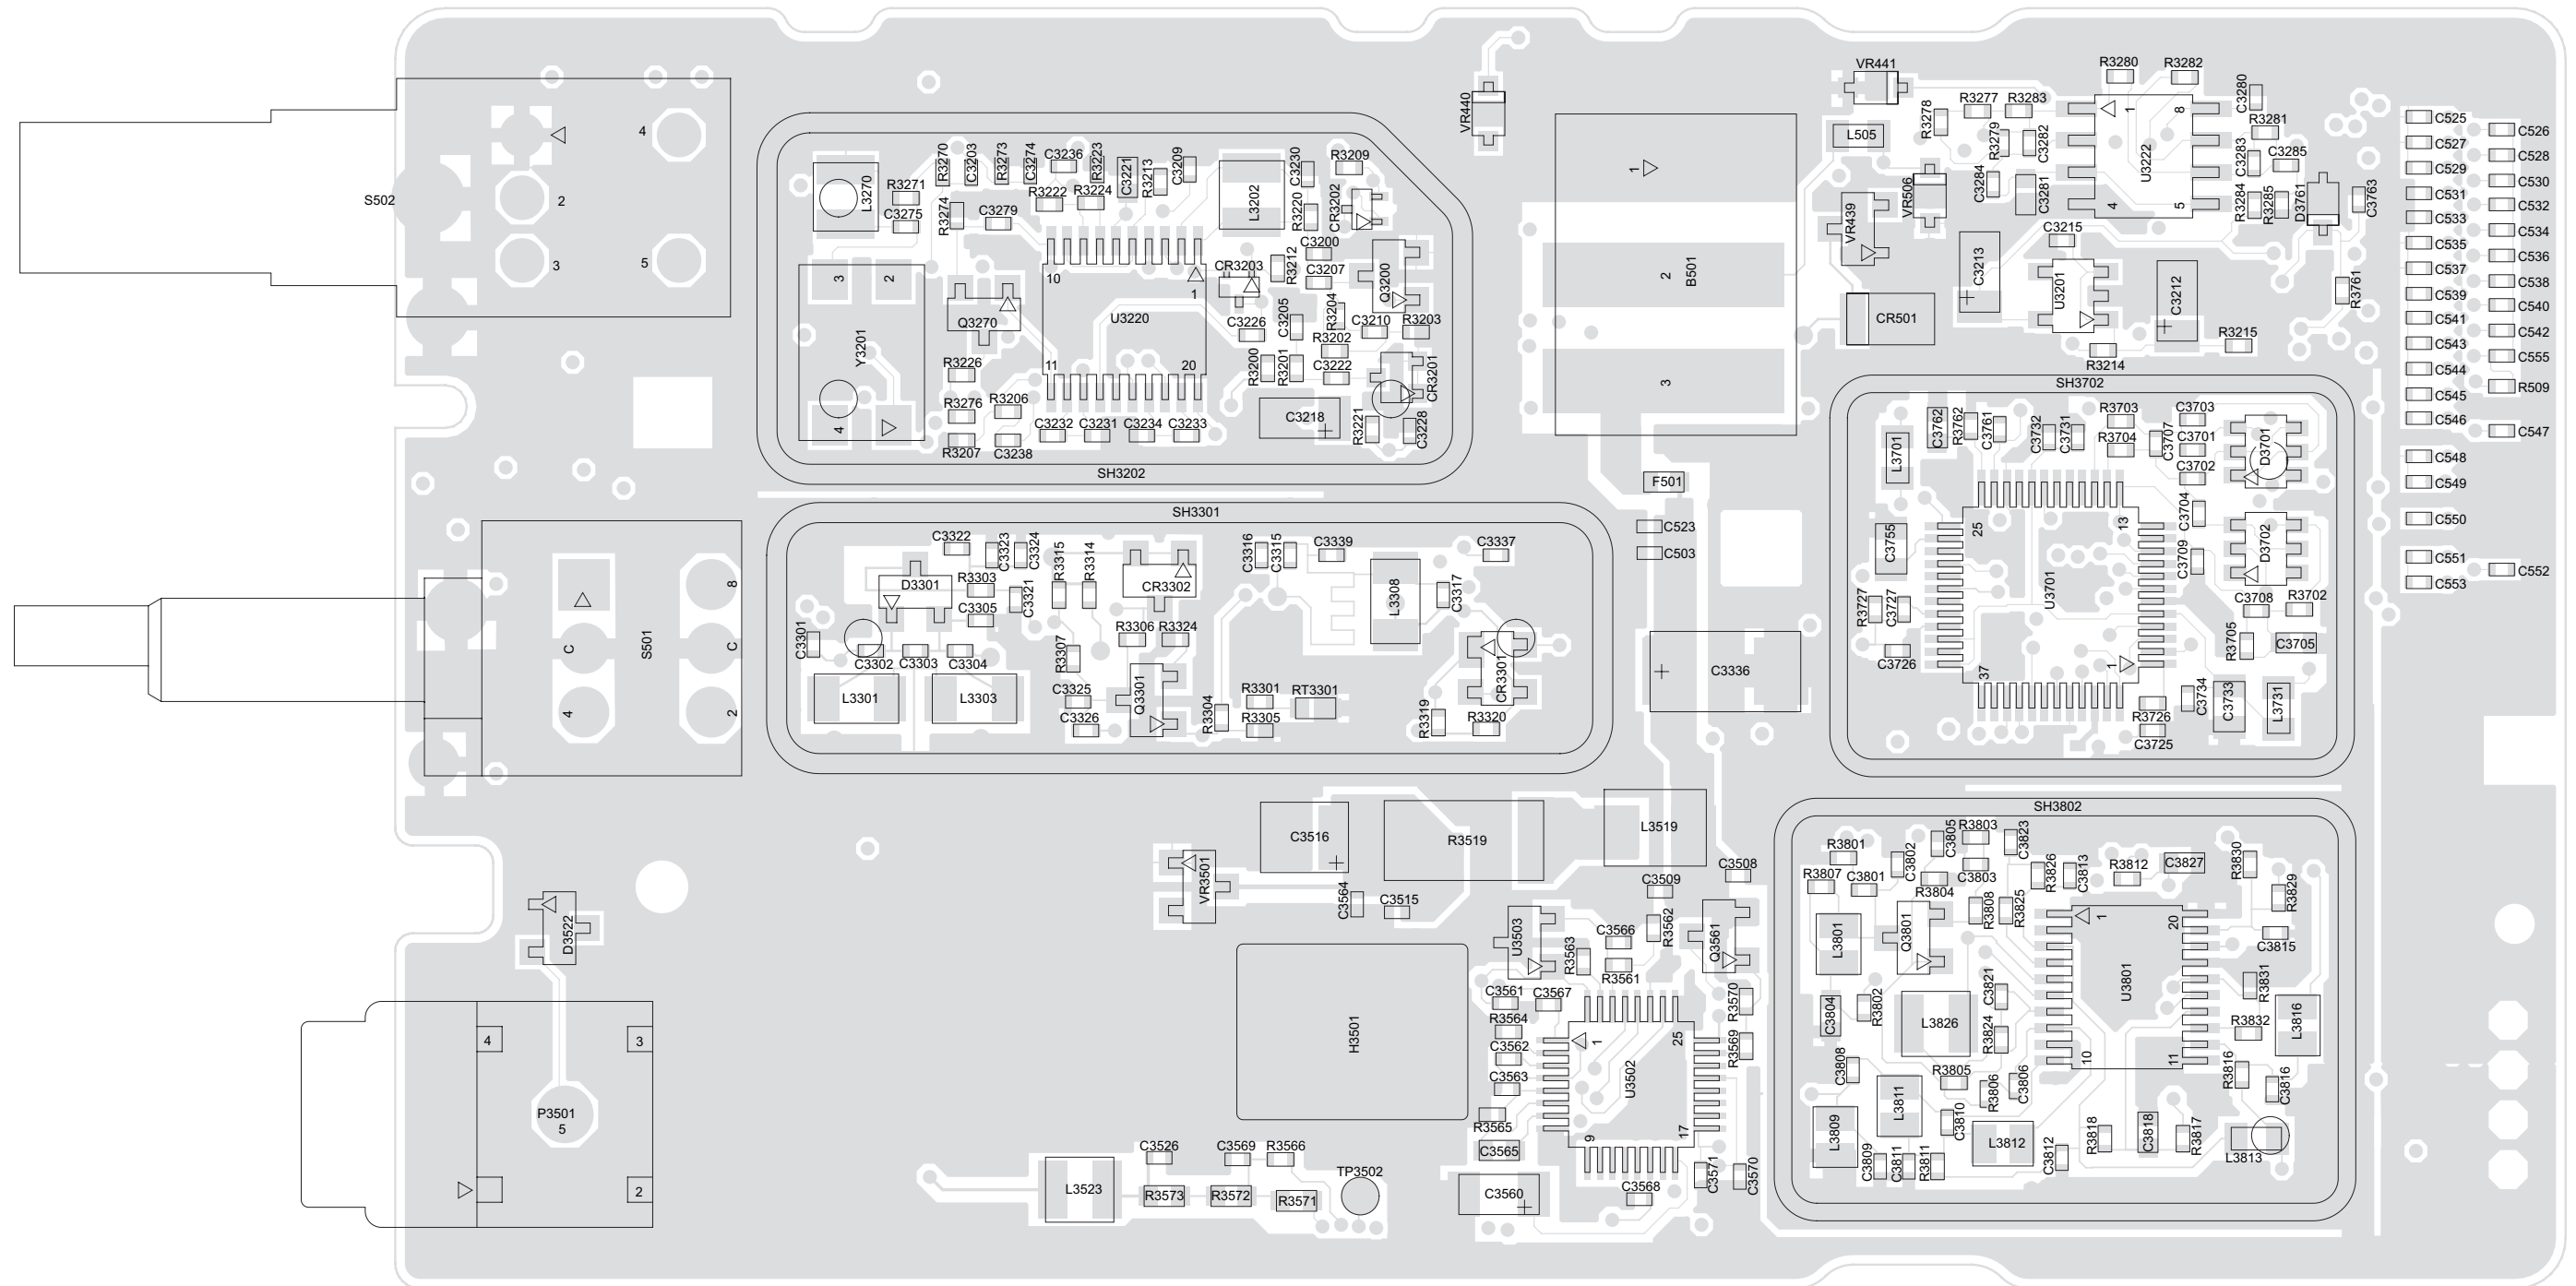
VHF (136-174MHz) Main Board Bottom Side PCB No. 8471021L01
